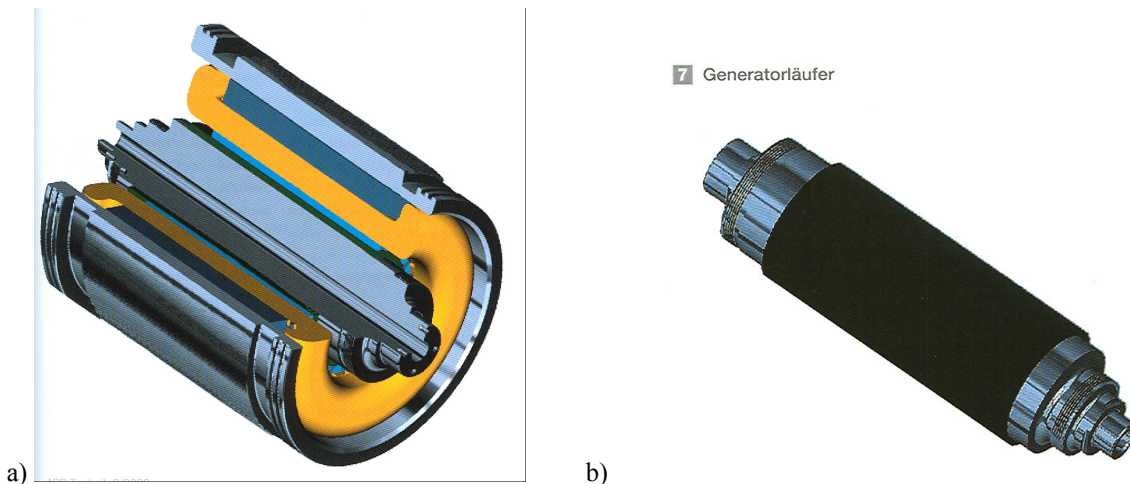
a) Stator and rotor of high speed PM magnet generator for micro gas turbine, b) PM rotor with carbon fibre sleeve and special high speed mechanical bearings for a micro gas turbine 100 kW, 70000/min (ABB, Sweden) [4]
